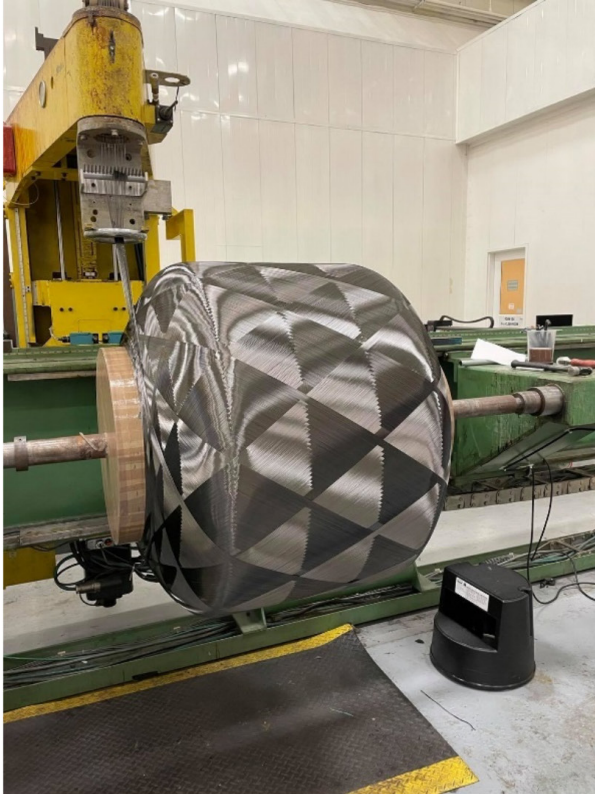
Dry winding to test filament winder settings before the actual wet winding is performed. Helical pattern is shown on left and hoop pattern is shown on right.
